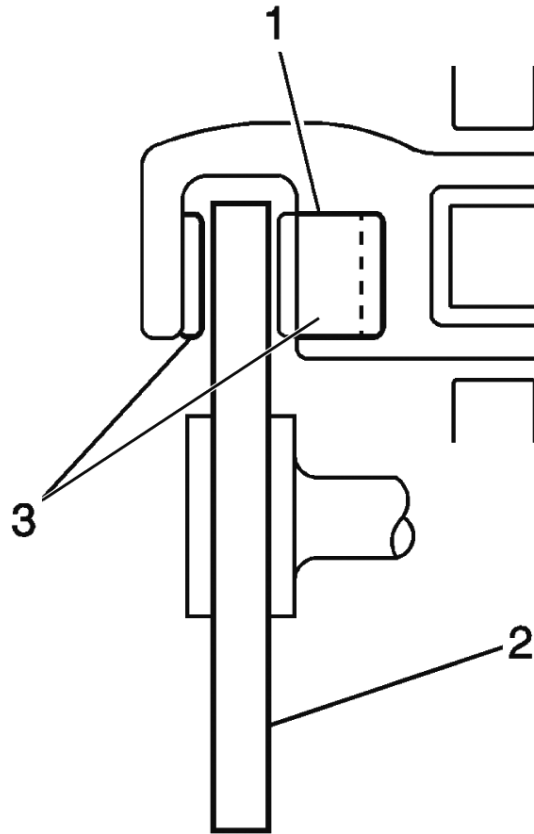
Brake Caliper Piston, Rotor And Brake Pads
